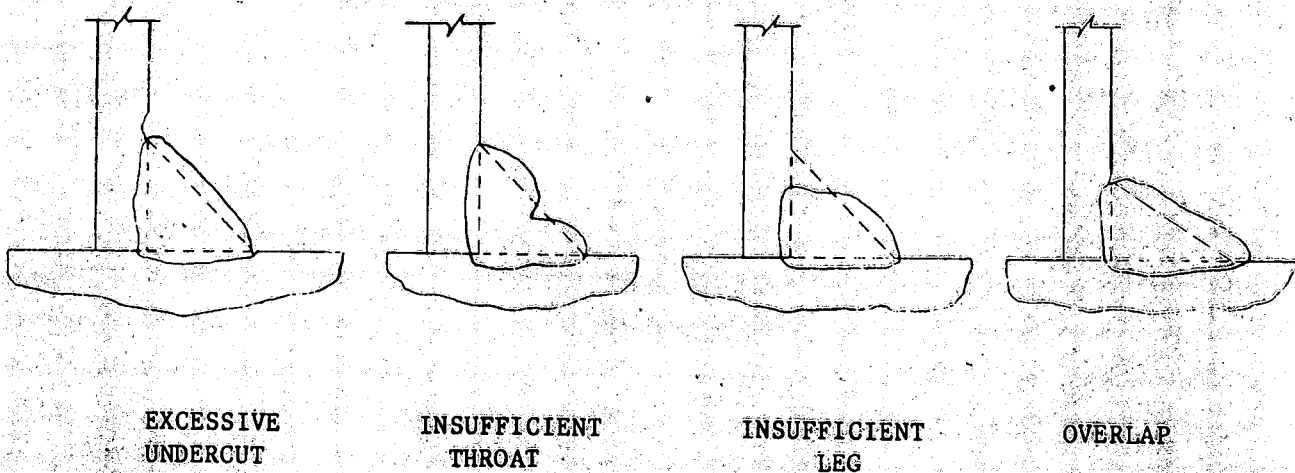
Unacceptable Fillet Weld Profiles
